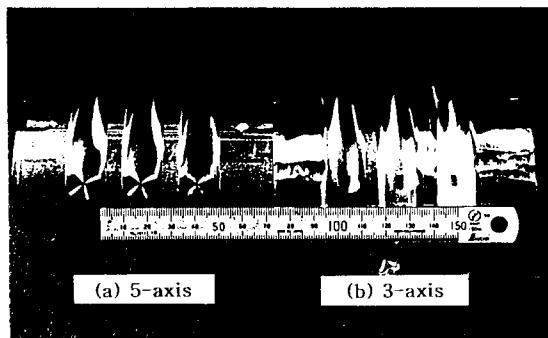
Polished Specimens with 5-axis & 3-axis Control Machining Center
